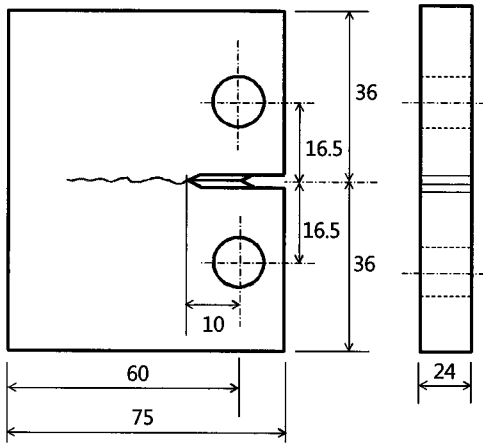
Configuration of CT specimen with fatigue crack (unit: mm)
